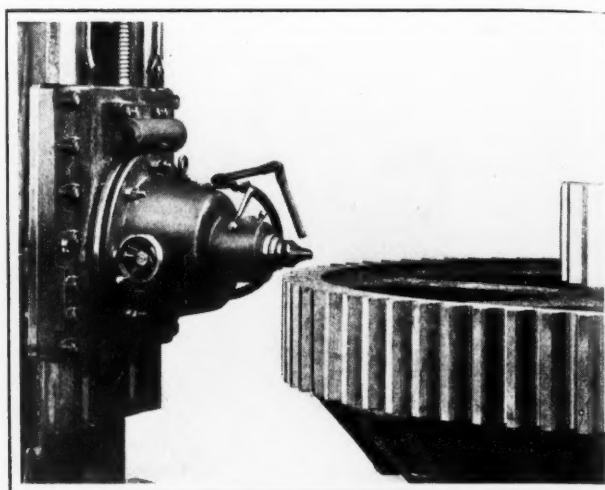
Cutting Large Spur Gear with the End-mill Cutter-head
